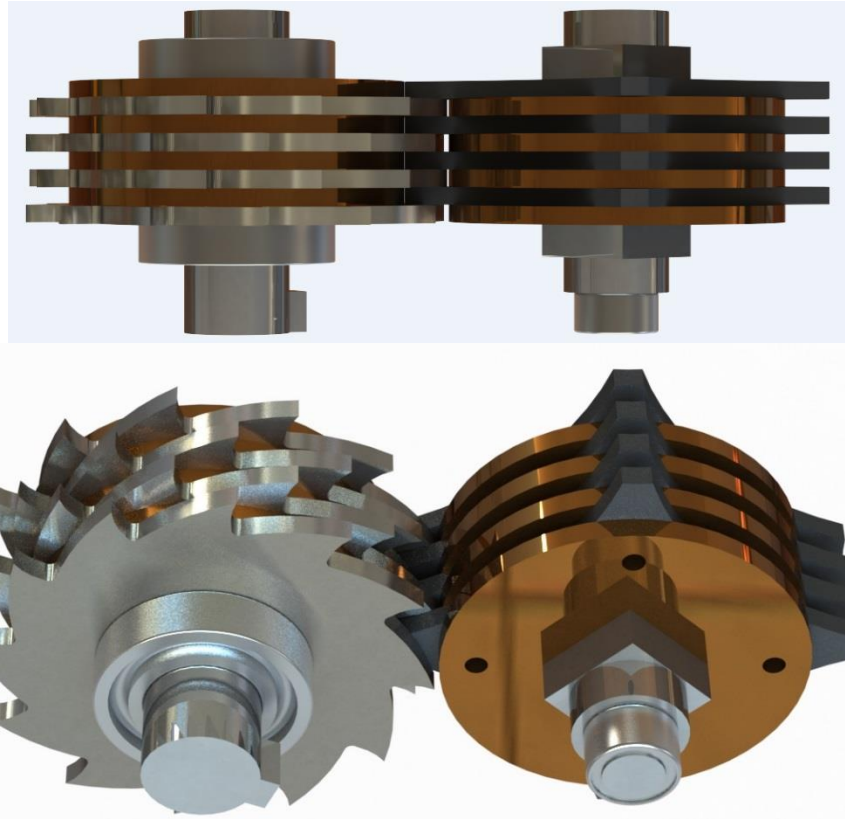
Needle cutter. Left: rotating cutters separated by spacers; Right: stationary cutters separated by spacers.
